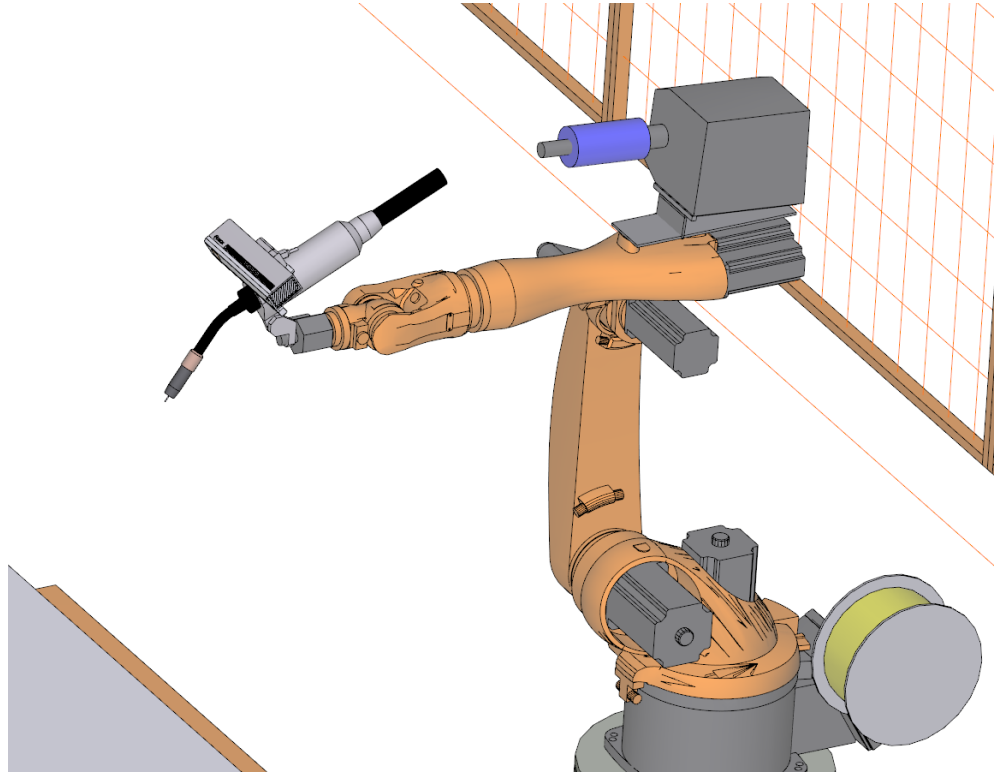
Sketch illustrating how a Kinect 3D camera could be mounted on a KR5 welding robot manipulator.
